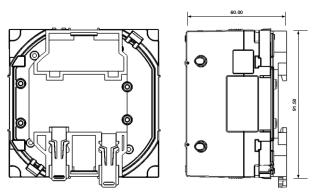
RPM335 PRO DIN Rail mounting dimensions
